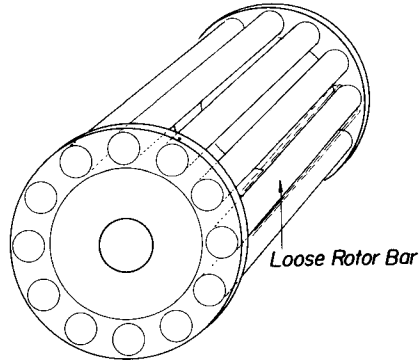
Rotor bars are welded or cast on end rings. One or more bars may loosen, thus causing poor operation of motor.
